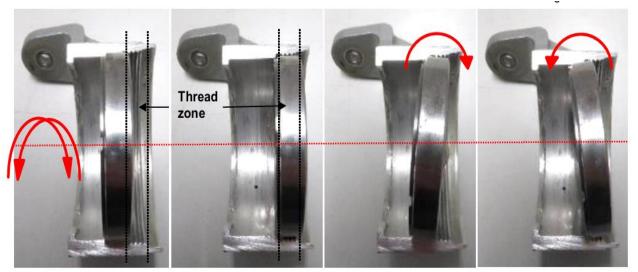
Representation of the probable positions assumed by the outboard bearing outer ring as it rotated and tilted during the event, impacting / slipping with the inner surface of the support bearing sleeve assembly.
